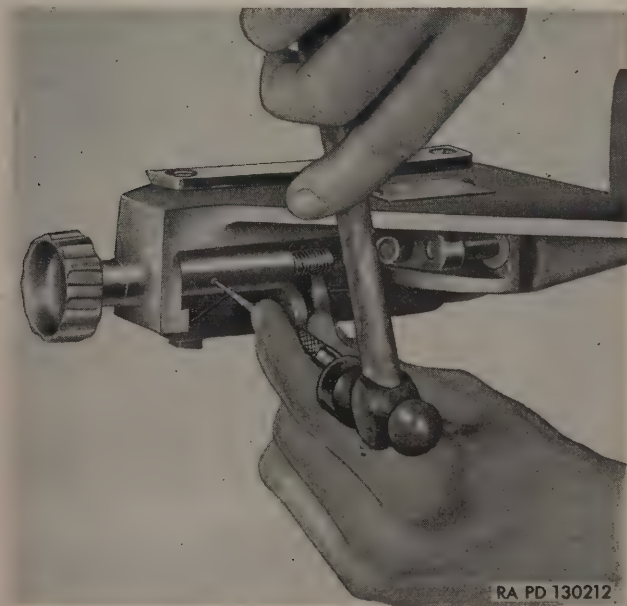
Removal of the lead screw assembly from the bracket—plotting boards M5 and M5A2.
